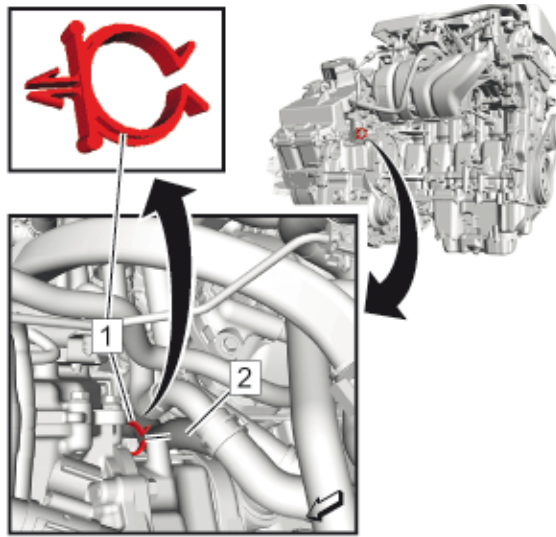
Heater Water Shutoff Valve Inlet Hose And Clip
